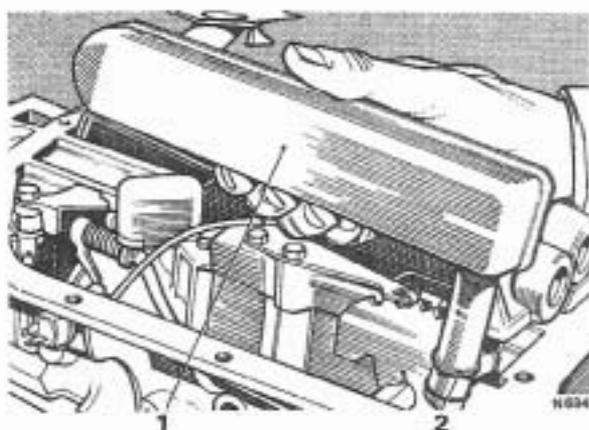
REMOVING THE STRAINER AND INTAKE PIPE ASSEMBLY (EARLY CARS)
